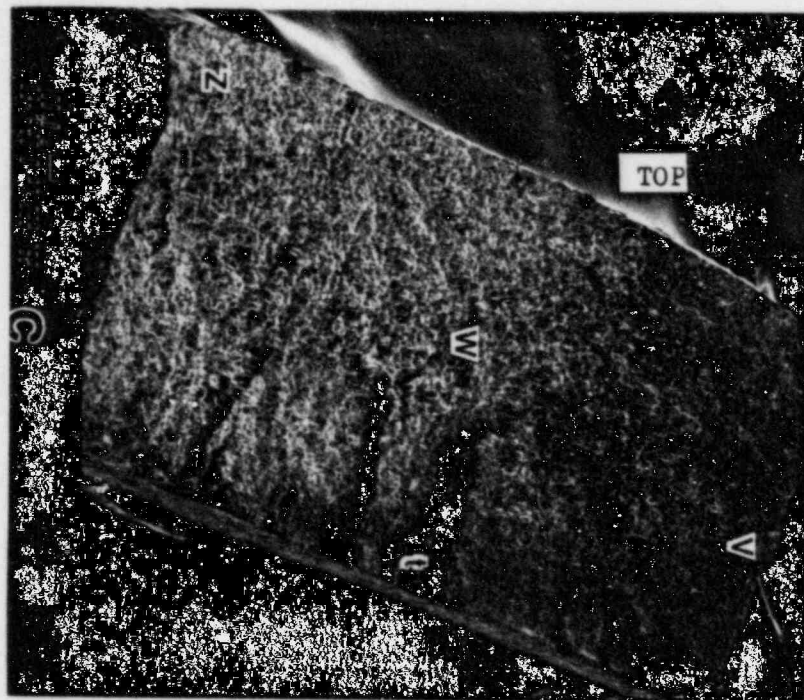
SEM Fractograph of the IN Situ Fracture in Spring DB-10, Area "C" as Shown in Figure 39.
